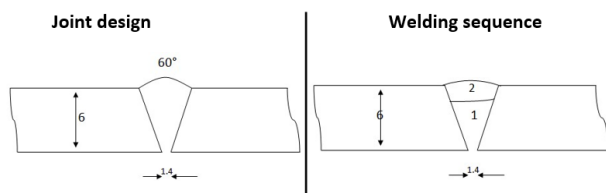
Schematic presentation of joint design and welding sequence
